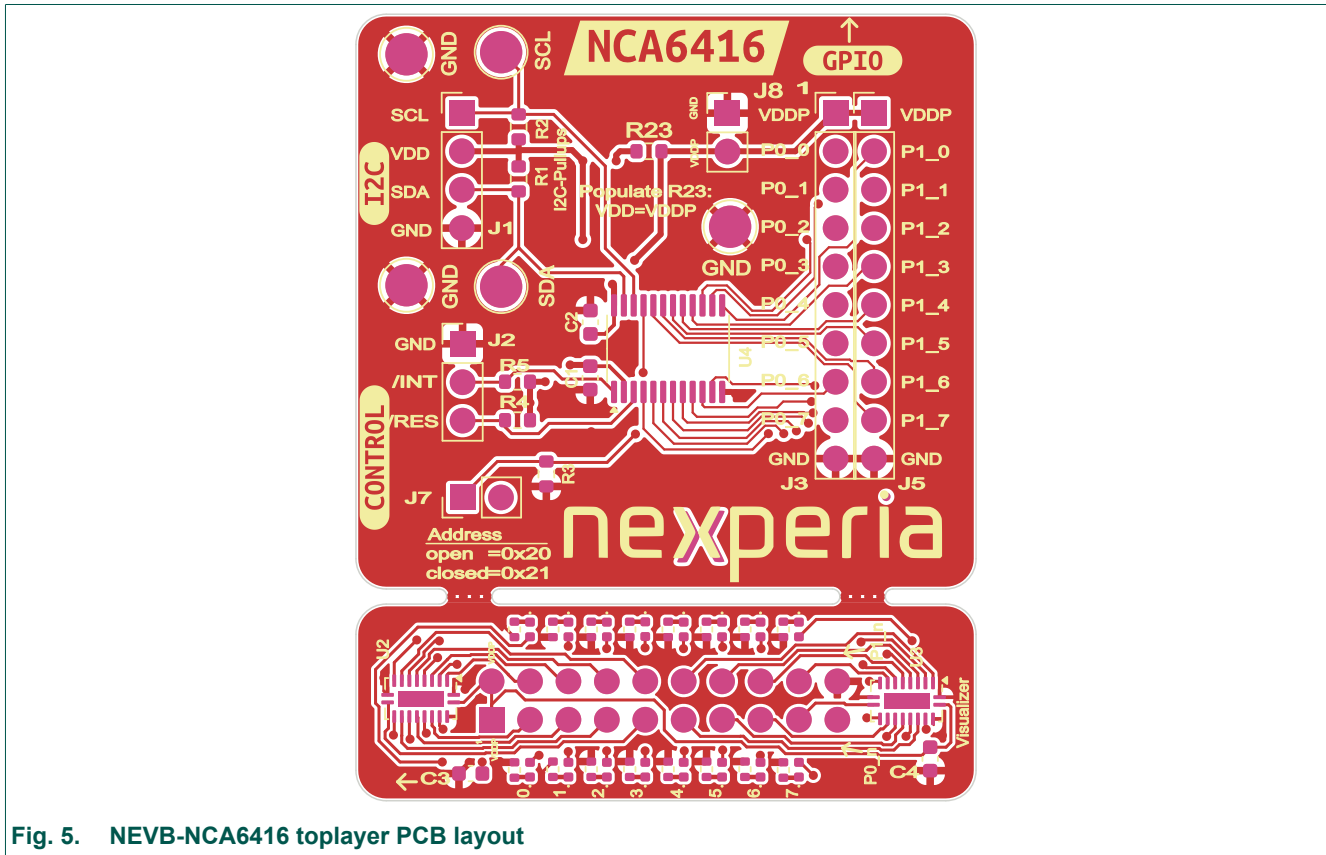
NEVB-NCA6416 toplayer PCB layout
